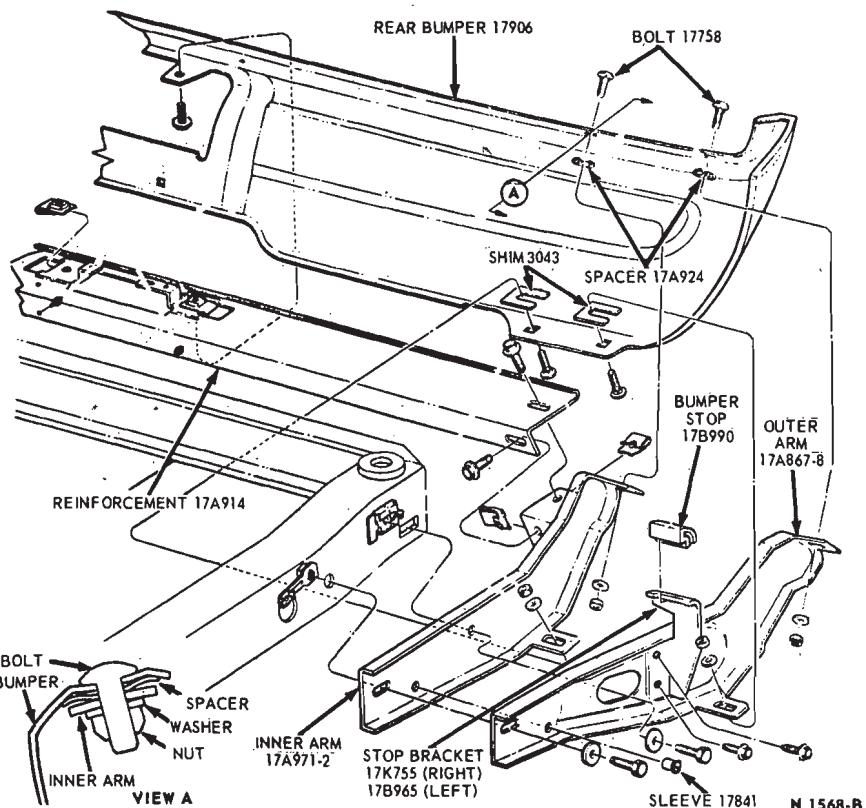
Rear Bumper Installation—Mercury and Meteor Except Model 71
